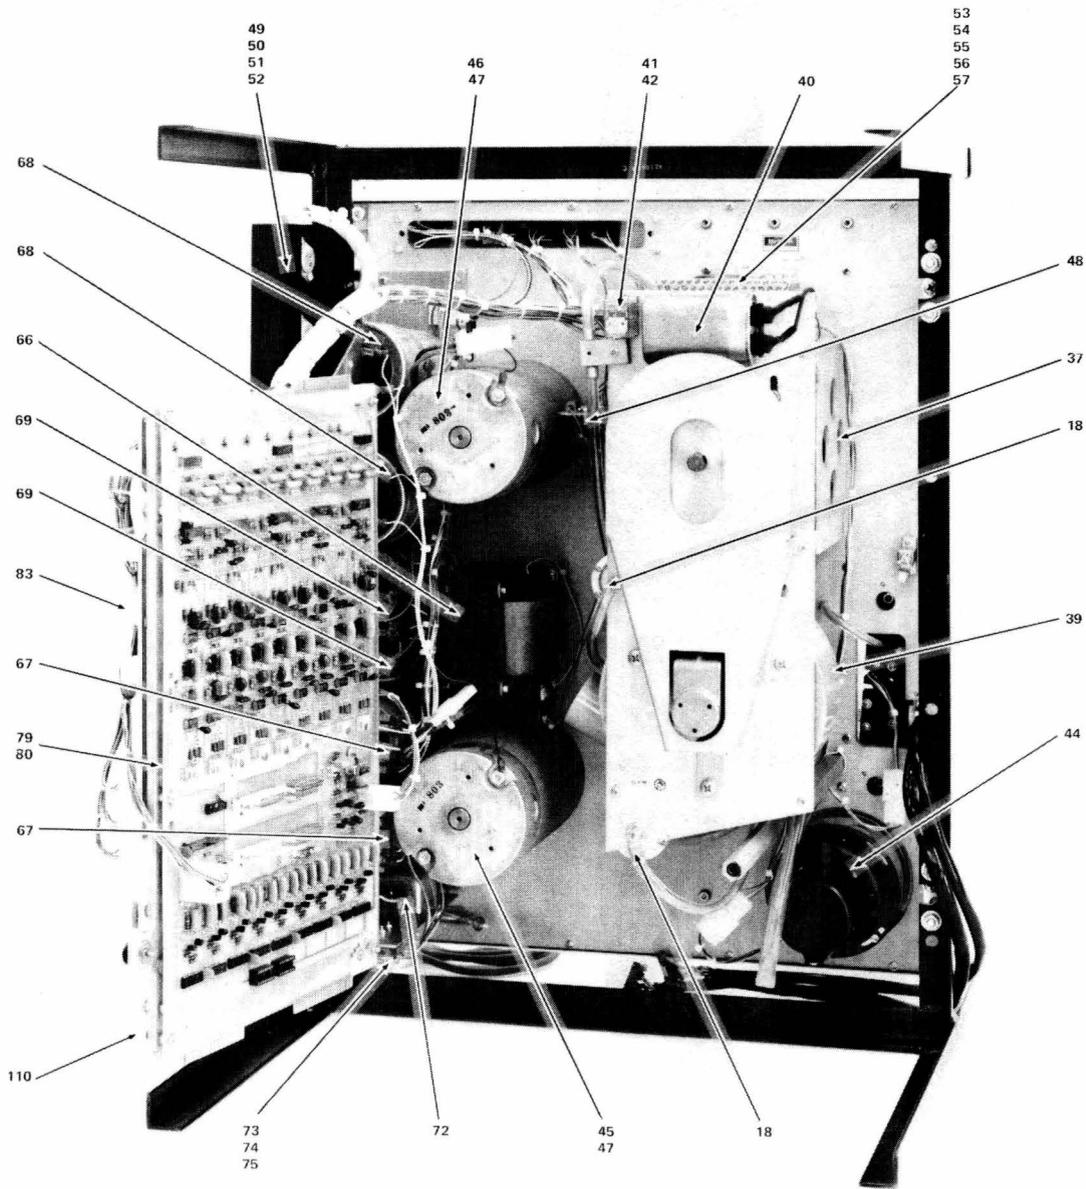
Model 2750 (Single Data Card Machine) Parts Location, Rear View
